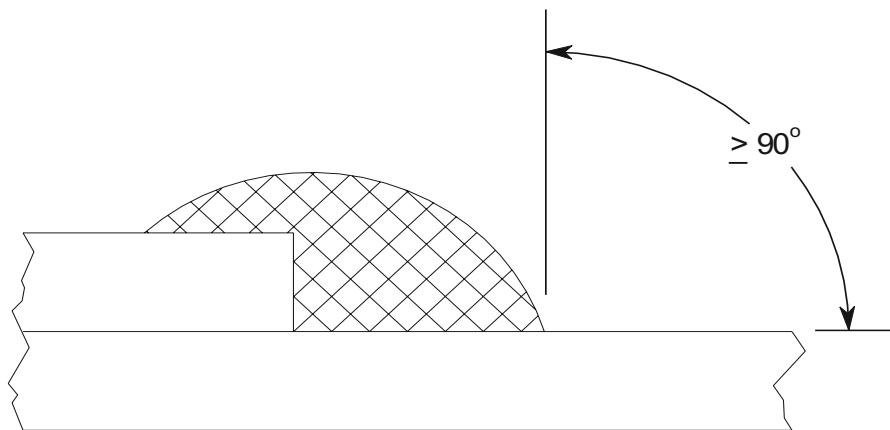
Sheet 2 : Cutaway View of Sealing Bead
